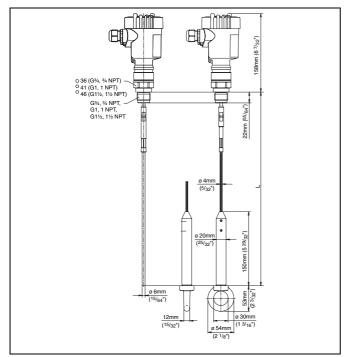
VEGAFLEX 61 - cable and rod version with thread
